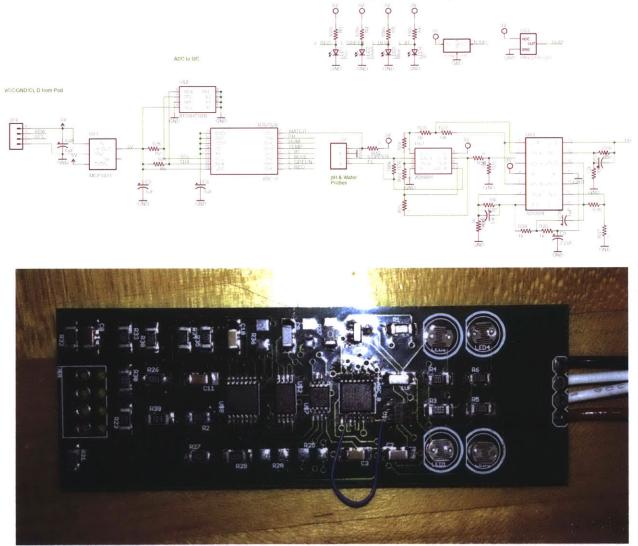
Top: Pod board schematic, bottom: custom pod board and components.
